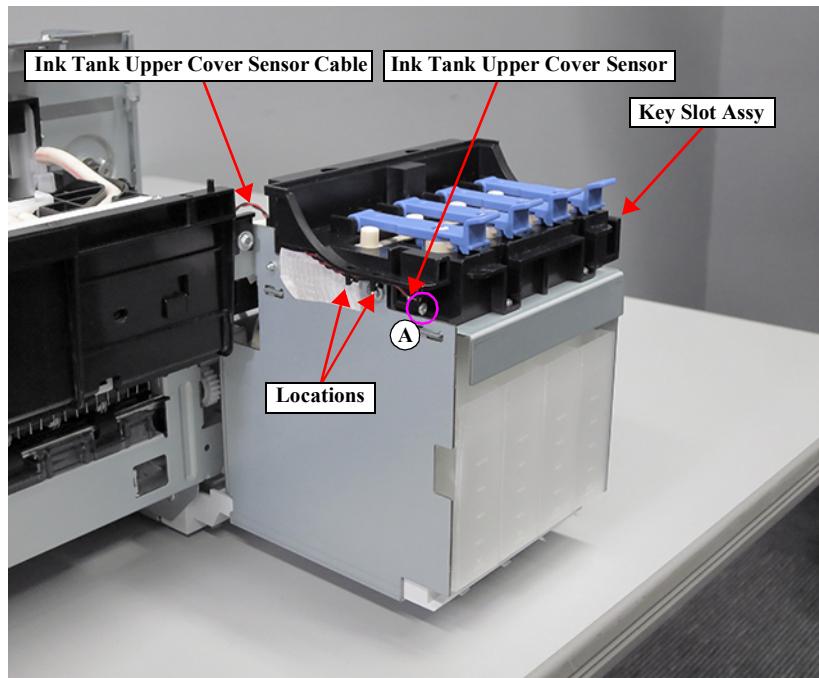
Removing the Ink Tank Upper Cover Sensor
